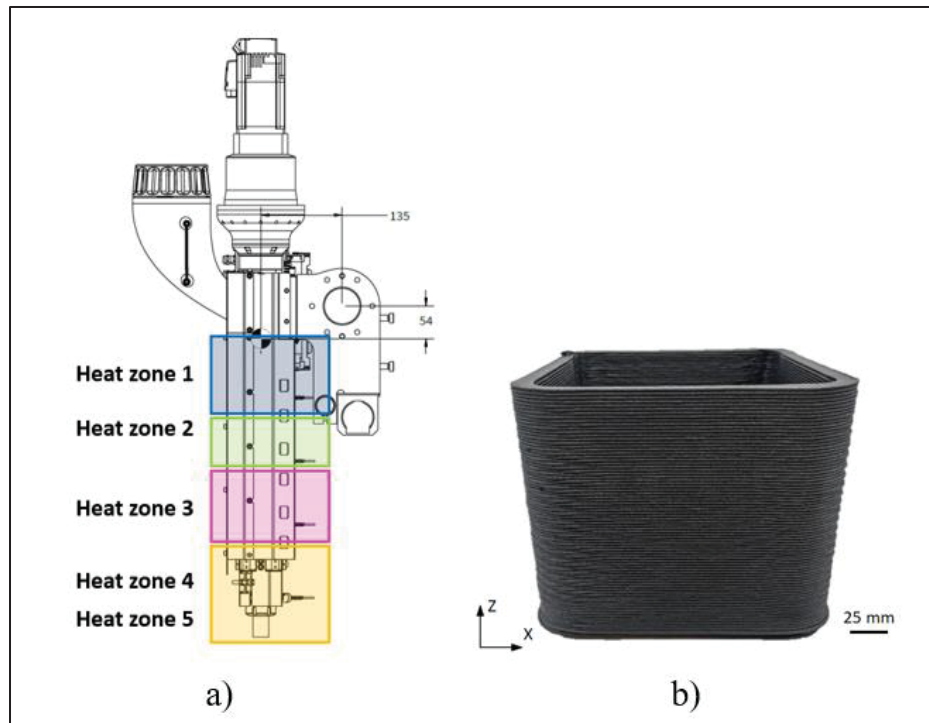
(a) Schematic of the five heating zones* and (b) a test box manufactured by FGF using CF/PEKK-PEEK recycled pellets
